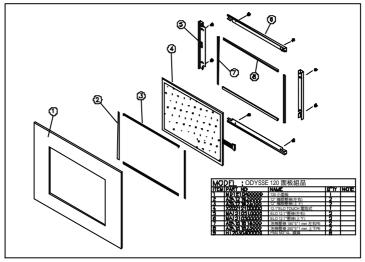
ODYSSE 120 FRONT BEZEL ASSEMBLY
